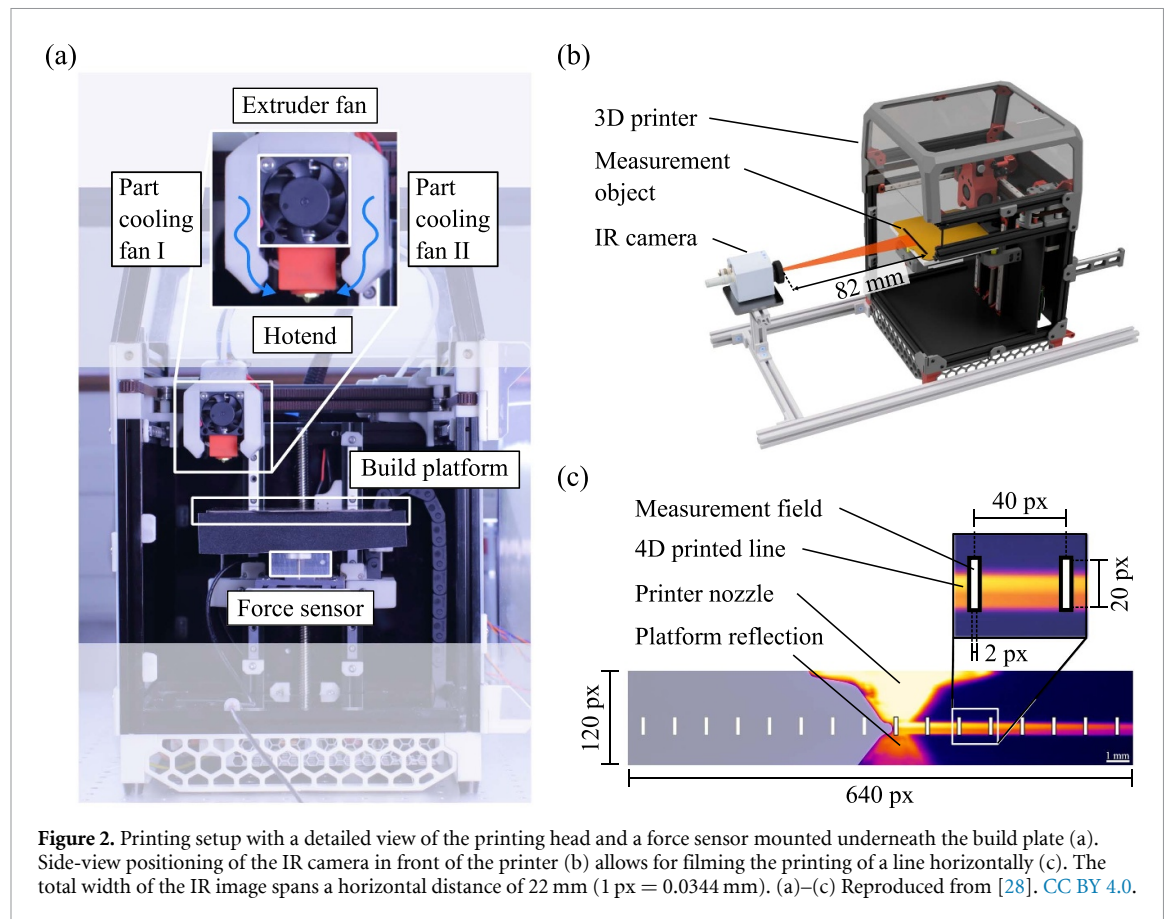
Printing setup with a detailed view of the printing head and a force sensor mounted underneath the build plate (a). Side-view positioning of the IR camera in front of the printer (b) allows for filming the printing of a line horizontally (c). The total width of the IR image spans a horizontal distance of 22 mm (1 px = 0.0344 mm). (a)–(c) Reproduced from [28]. CC BY 4.0.
